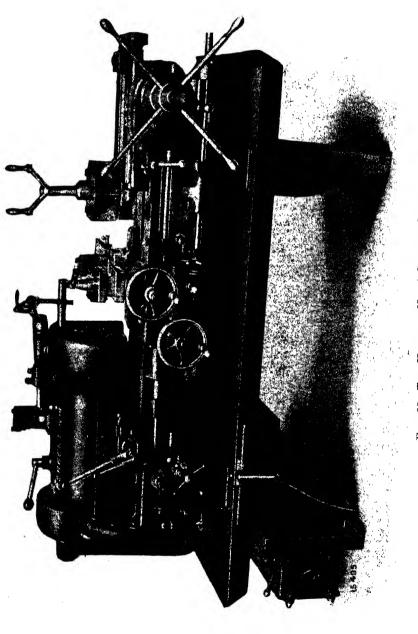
THE HERBERT NO. 4 CAPSTAN LATHE
